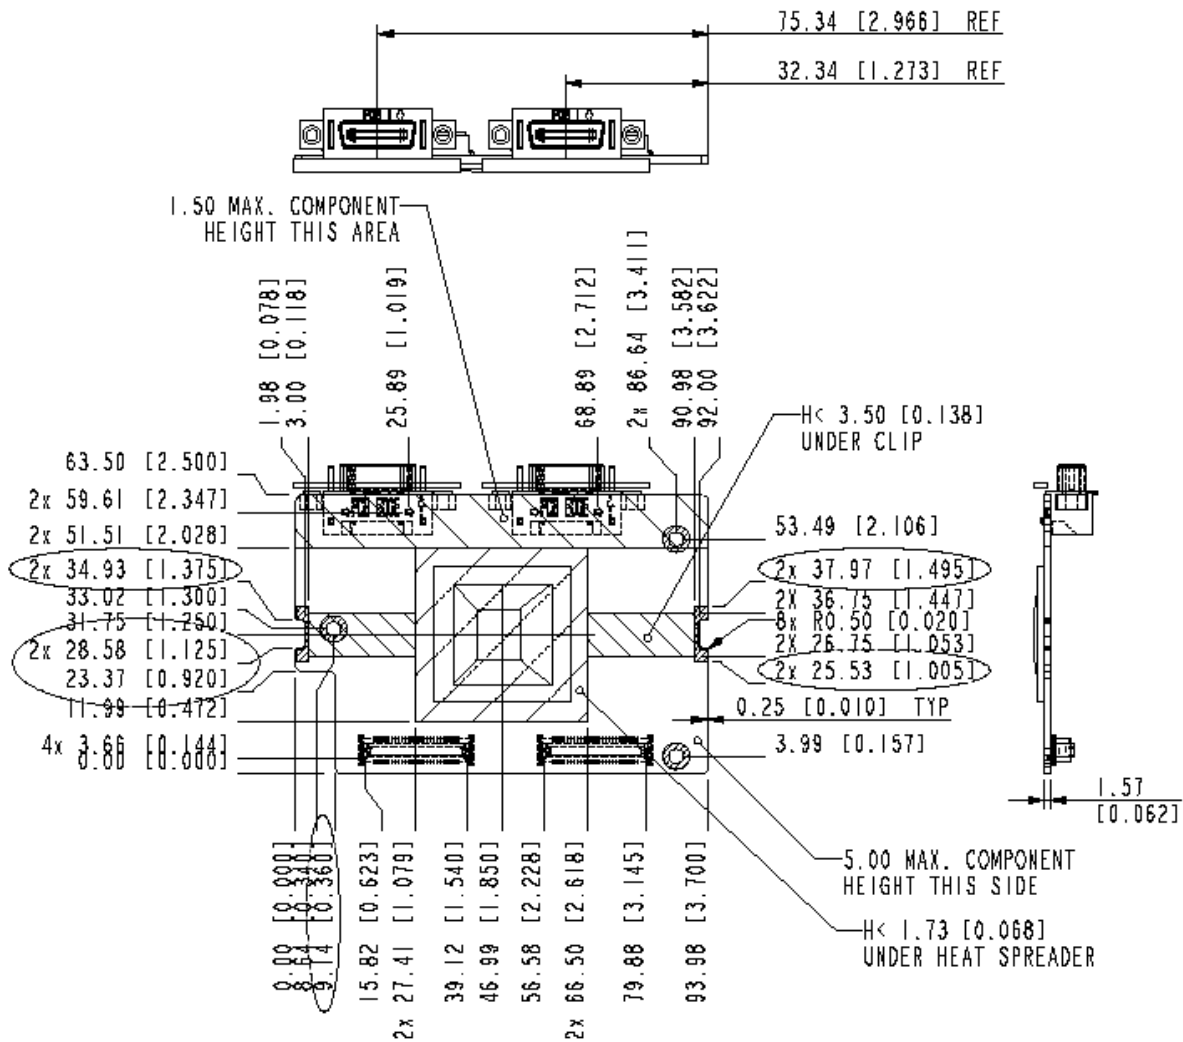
Dual 10 Gb Ethernet I/O Module Dimensions: Top and Side Views
